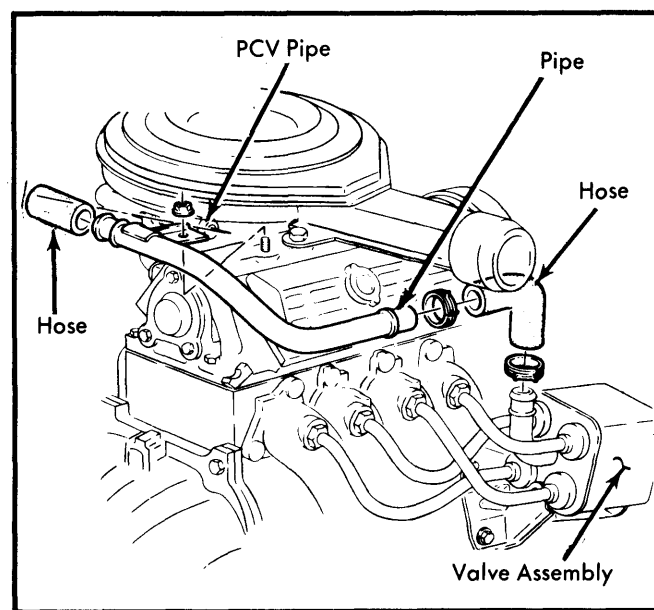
Showing Typical Installation of PAIR Valve Pipe and Hose
